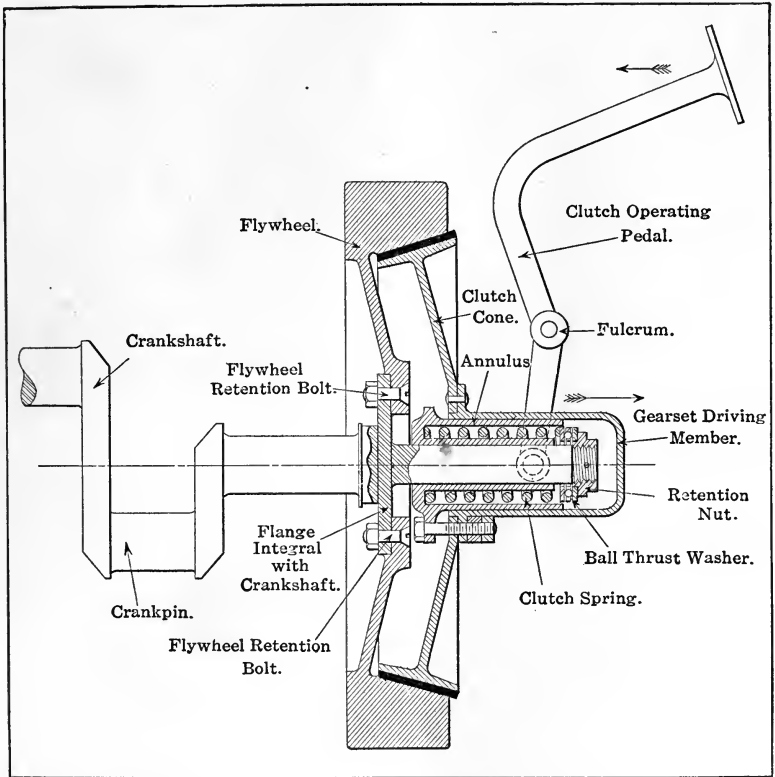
Sectional View of Cone Clutch Having Female Member Formed Integral with Fly-Wheel Rim.
